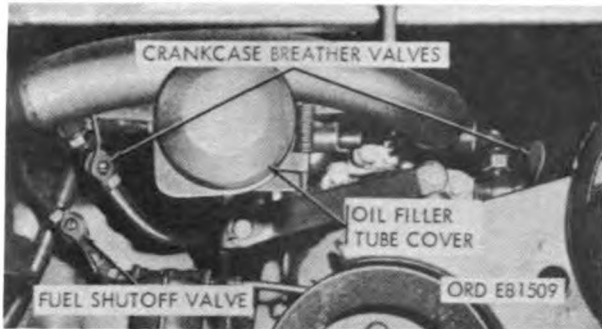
Location of fuel shutoff valve, crankcase breather valves, and oil filler tube cover.
